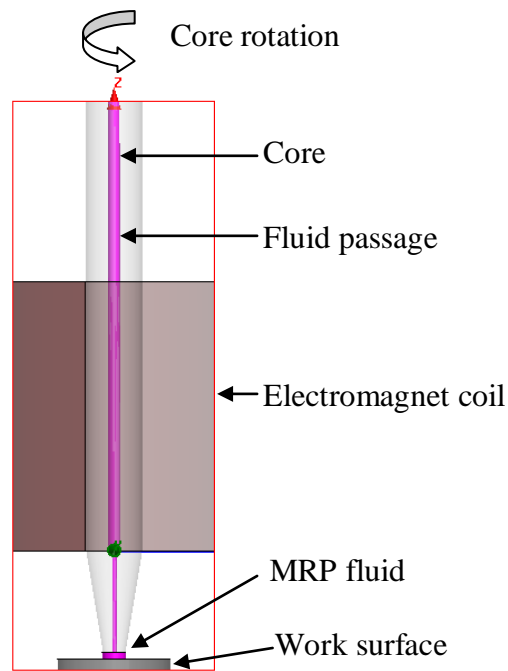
Electromagnet model of ball end type magnetorheological finishing hollow core tool
